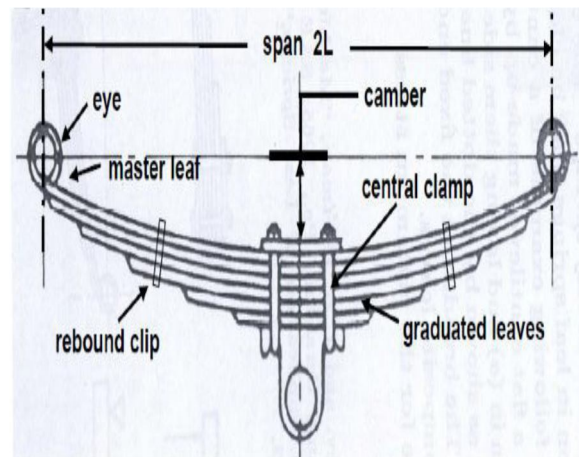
Leaf spring assembled at rear axle of automotive & Multi-Leaf Spring [2]
